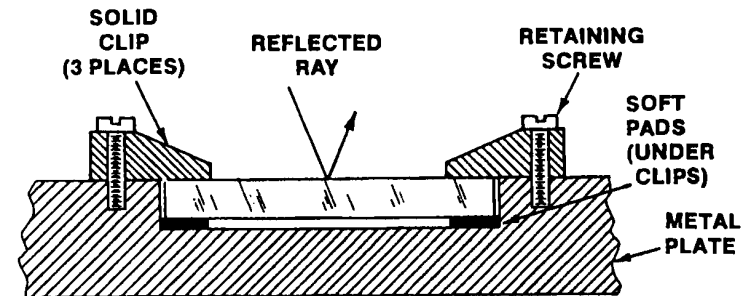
Mirror constraint using resilient pads as springs. (From Yoder.⁴)
